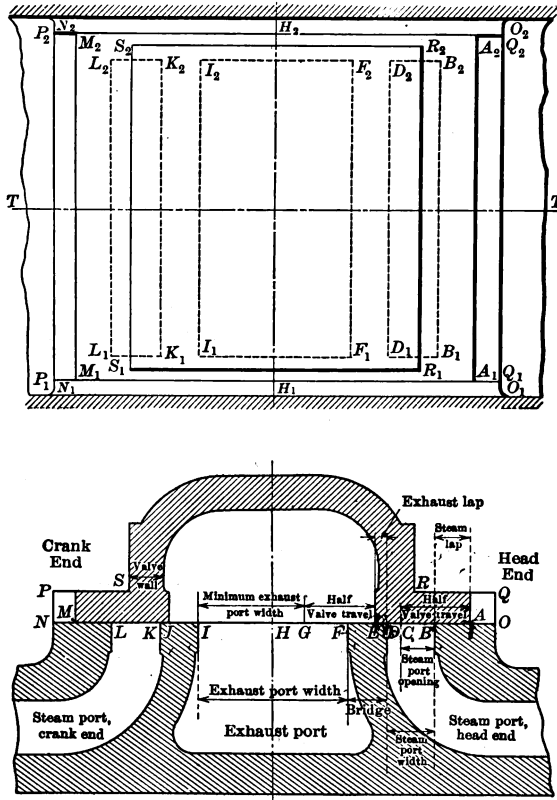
TOP VIEW AND CROSS-SECTION OF PLAIN D-VALVE
